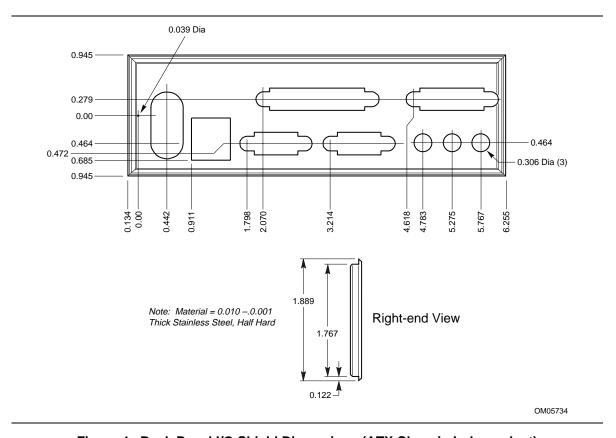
Back Panel I/O Shield Dimensions (ATX Chassis-Independent)
